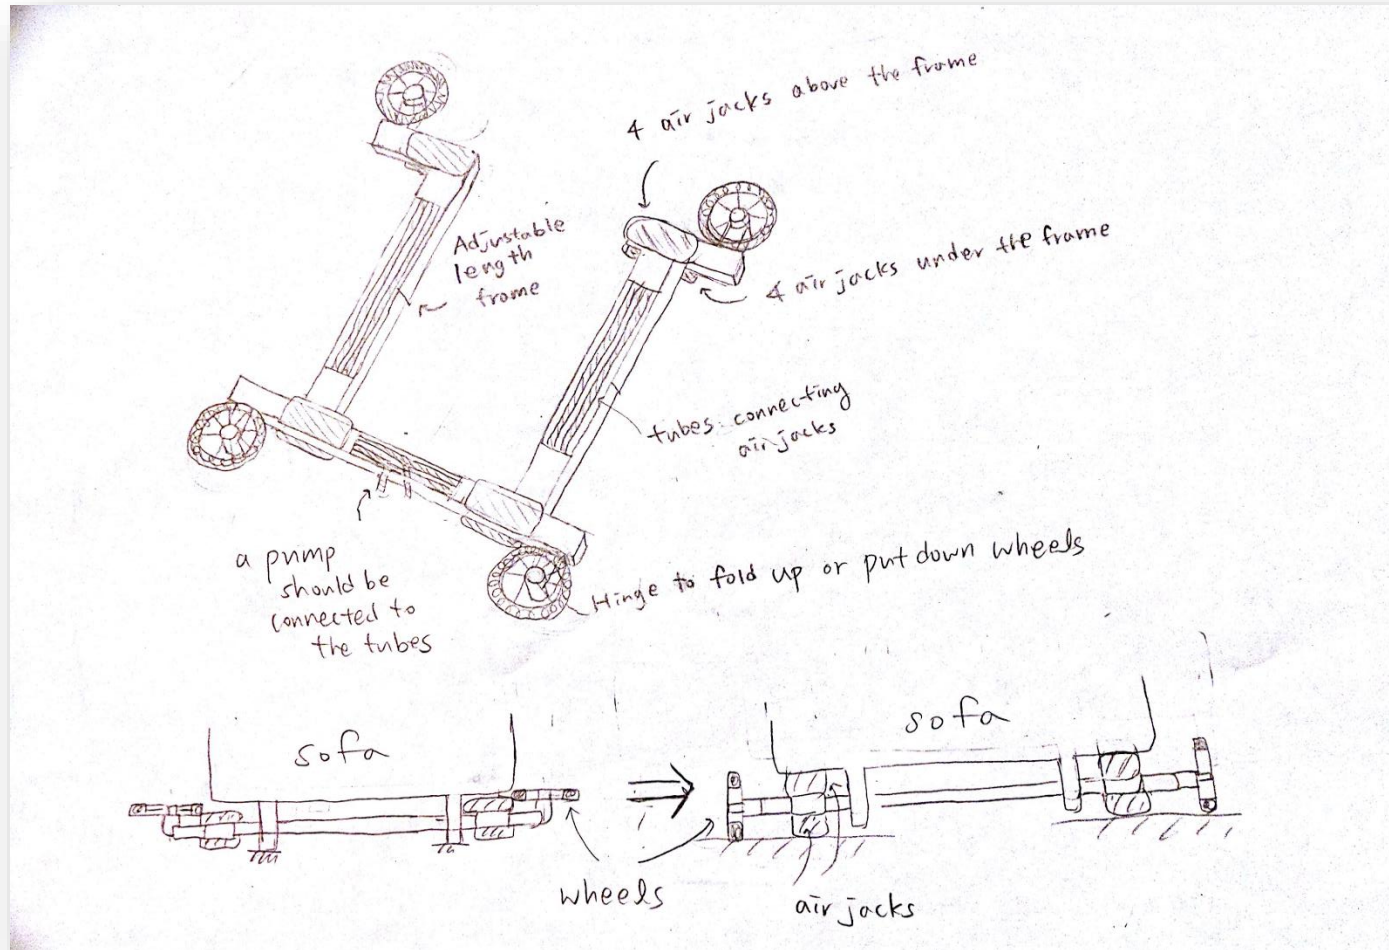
Design concept 4 -- C-shaped frame with foldable wheels
